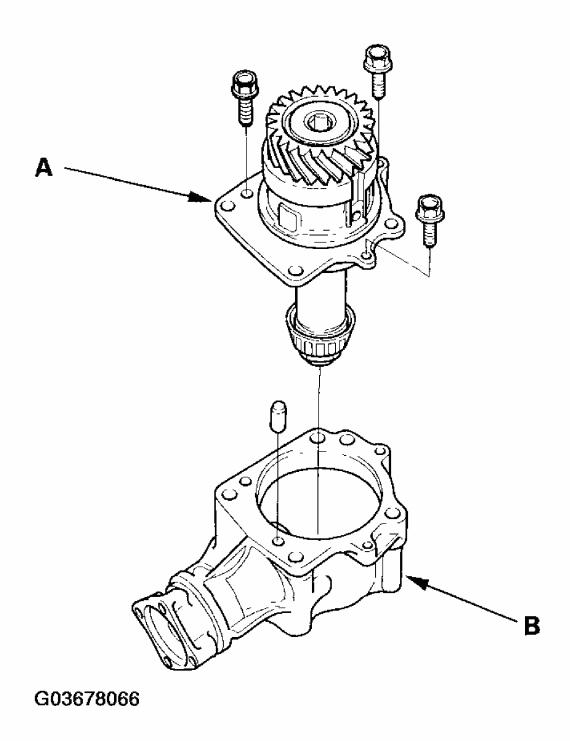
Removing Transfer Holder Assembly From Transfer Housing Courtesy of AMERICAN HONDA MOTOR CO., INC.
